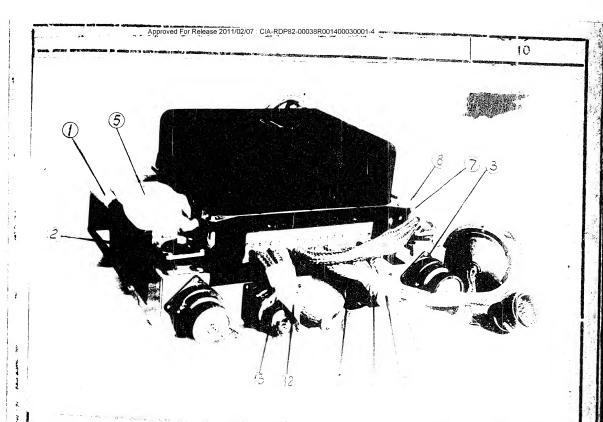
U-C Gyro Unit-to-Mounting Attachment
